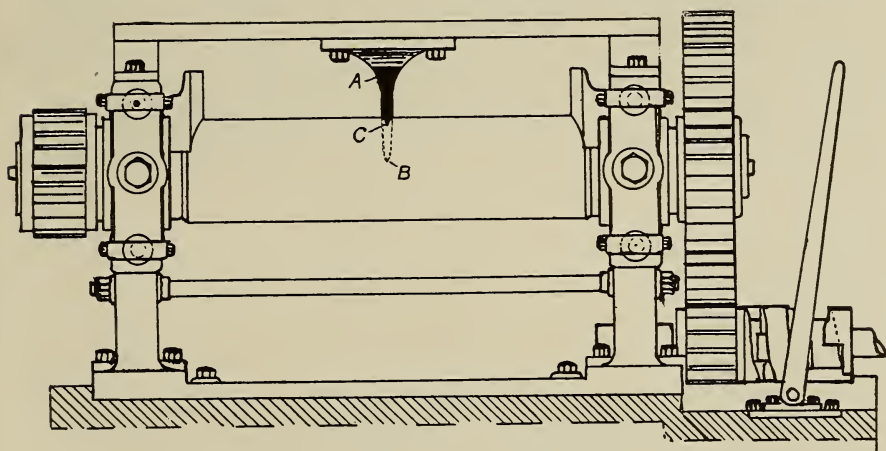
"JUMBO" MILL WITH PARTITION.
